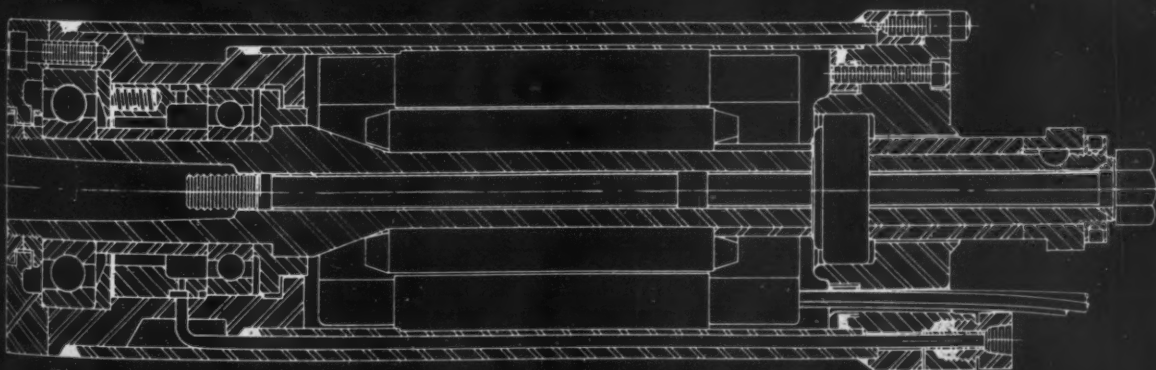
Above—High-frequency water-jacketed milling motor mounted in conventional milling machine. Speeds from 9000 to 15,000 rpm are instantly available with this unusually compact arrangement
